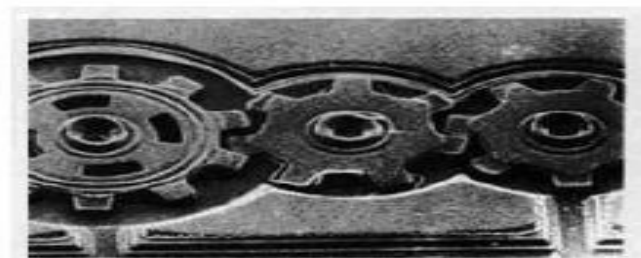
Micro gears are fabricated using surface micromachining technology [10].
